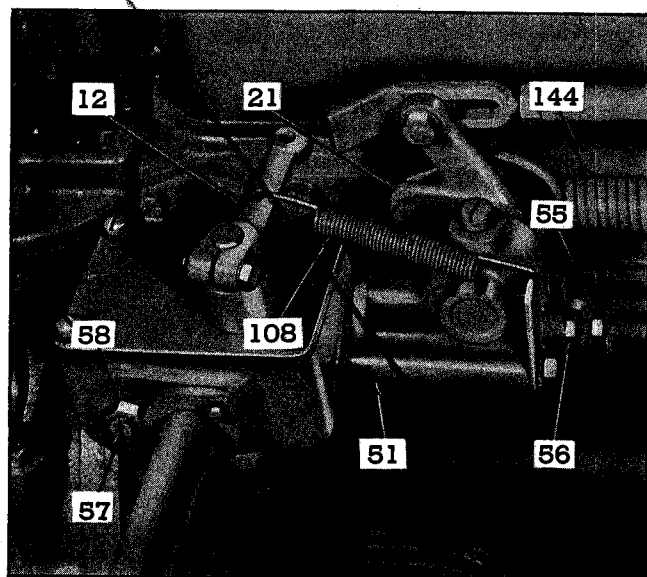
Buffer and Idle Speed Adjusting Screws.
